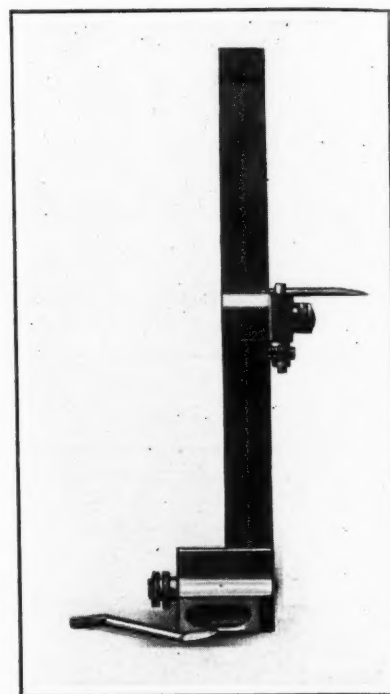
Machinist's Scale Equipped with Height Gage Scriber
